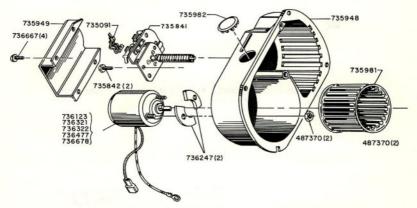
VENT AIR BLOWER ASSEMBLY 735945, 736488 and 736654 USED ON KIT MODELS 735900, 8341, 8343, 8345
